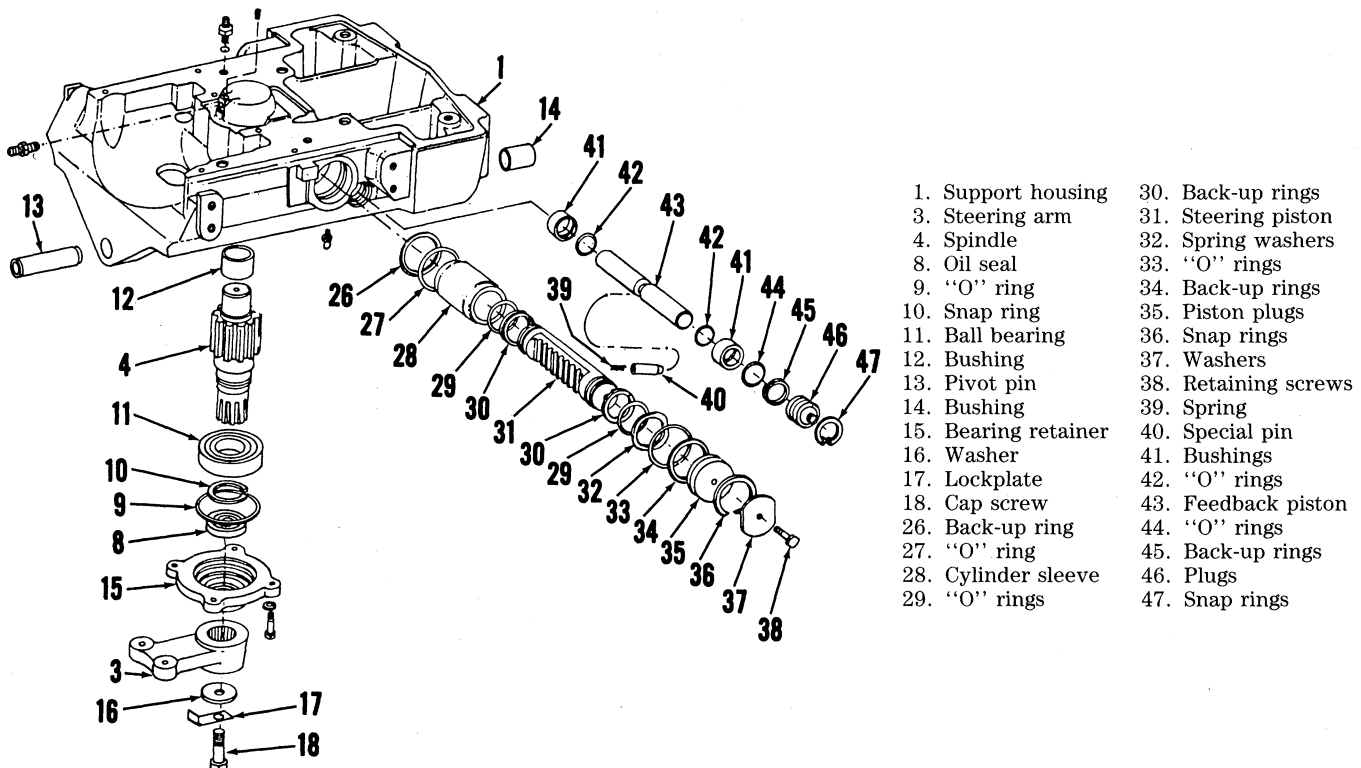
Exploded view of front support and steering motor assembly used on 4050, 4250 and 4450 tractors. Front support and steering motor used on 4650 and 4850 tractors is similar except two pistons (31) are used, one in front and one behind spindle (4).
